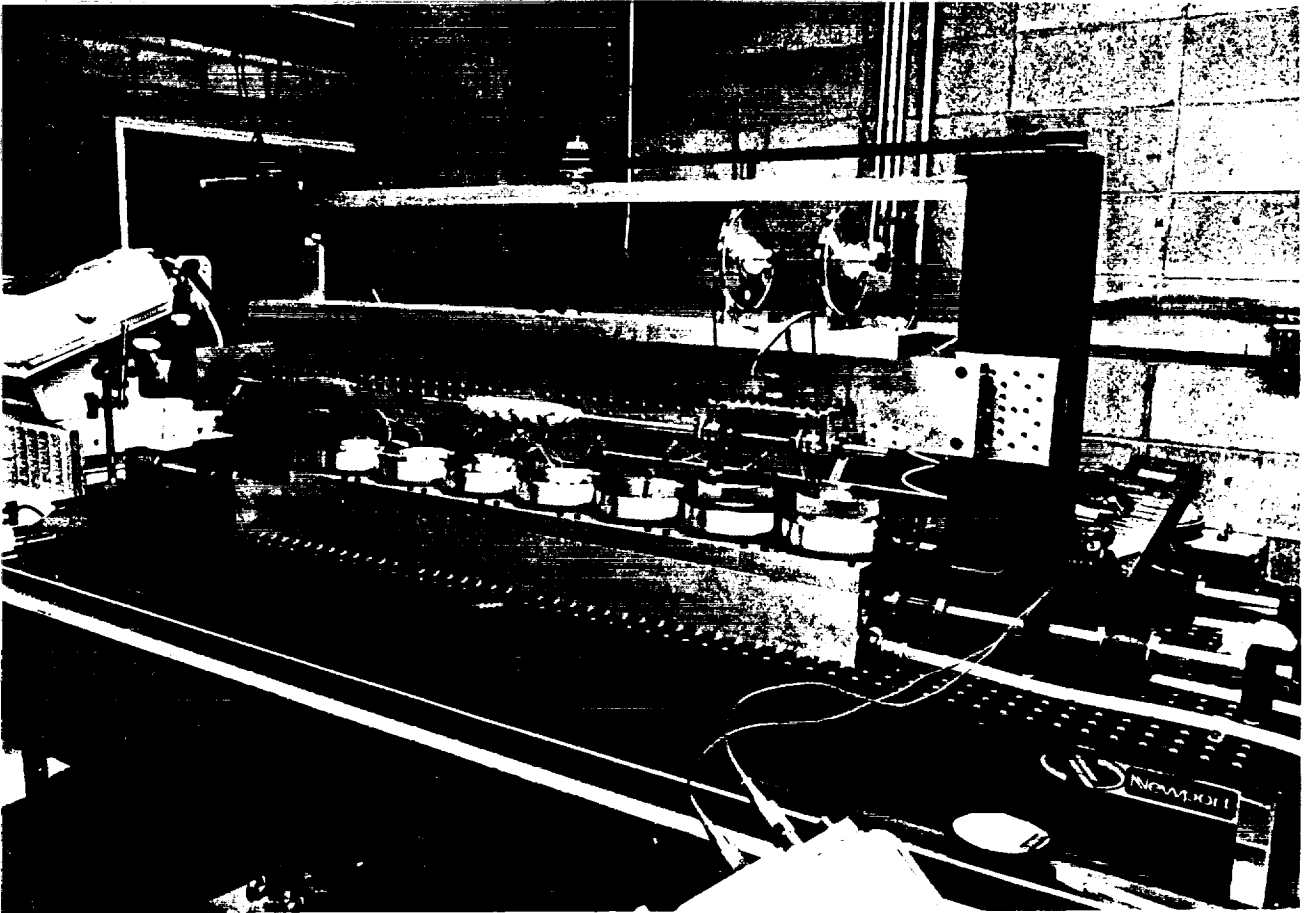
PARTIALLY ASSEMBLED SLOT CUTTING MACHINE
